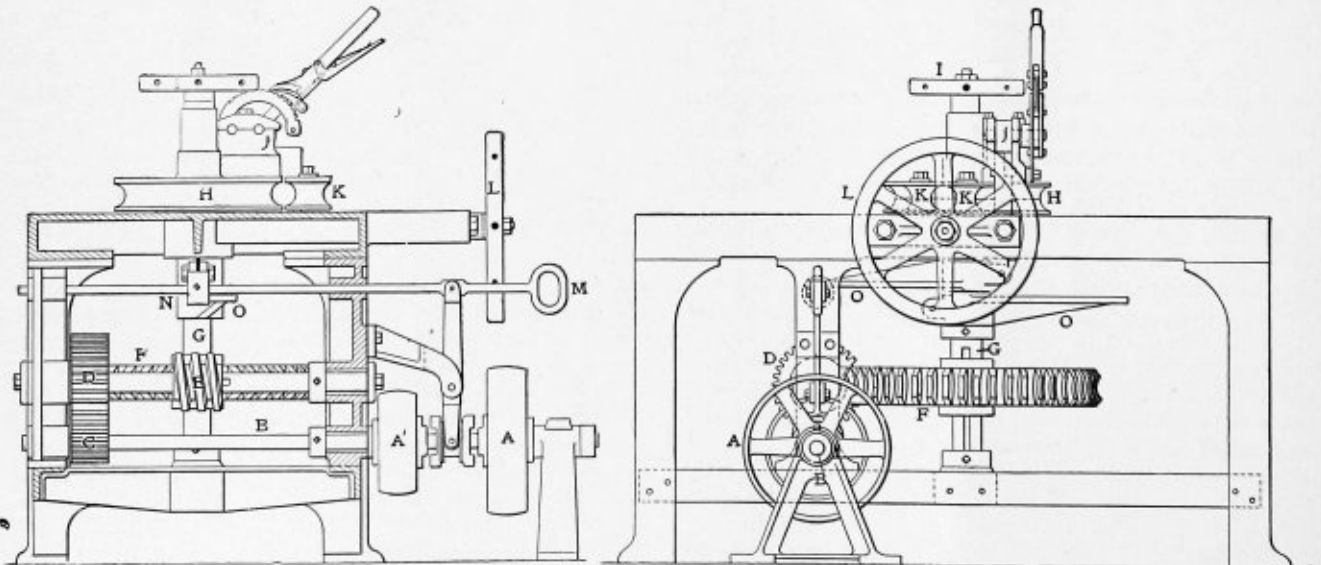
AN AUTOMATIC PIPE-BENDING MACHINE.
